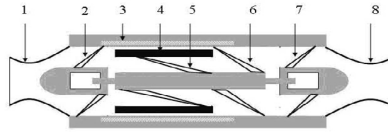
1-Inlet tie-in, 2-Inlet guide vane, 3-Motor stator, 4-Magnetic ring,5-Small impeller, 6-Big rotor, 7-Outlet guide vane, 8-Outlet tie-in
